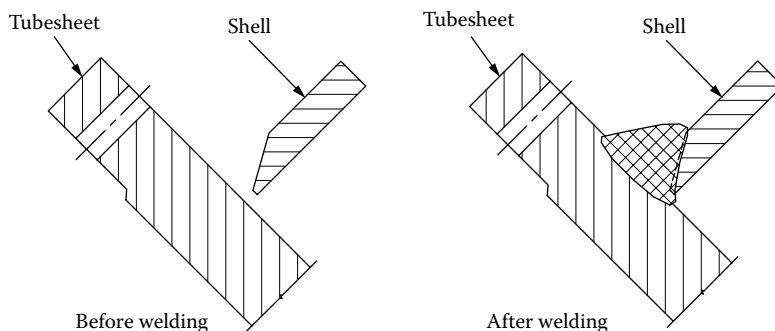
Tubesheet to shell welding—root run by TIG welding.
